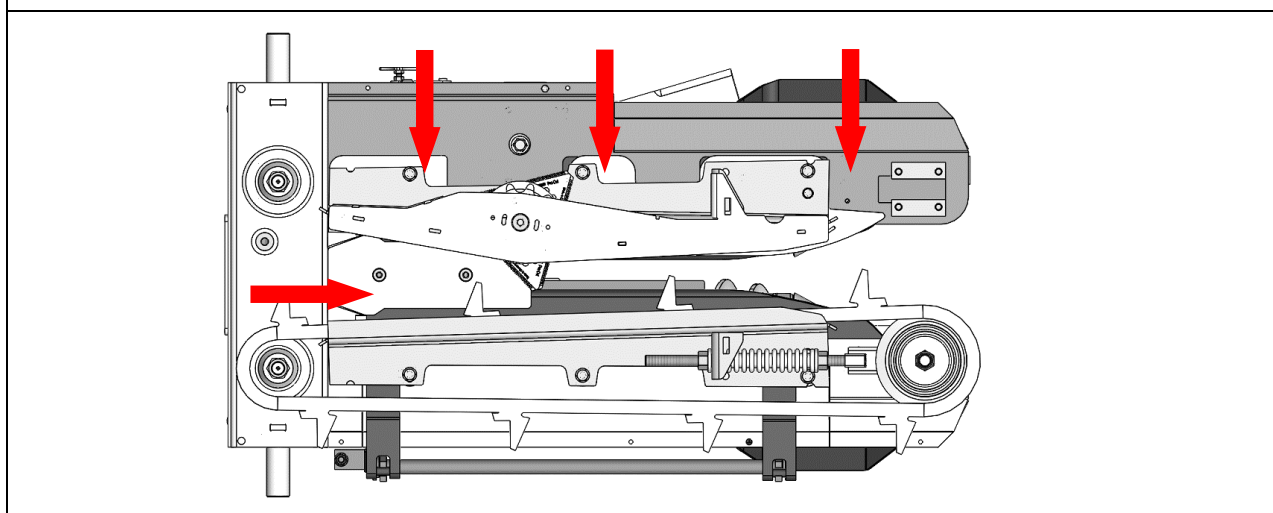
Install the sunflower kit, tighten the screws. Tighten the counter blade screws!
